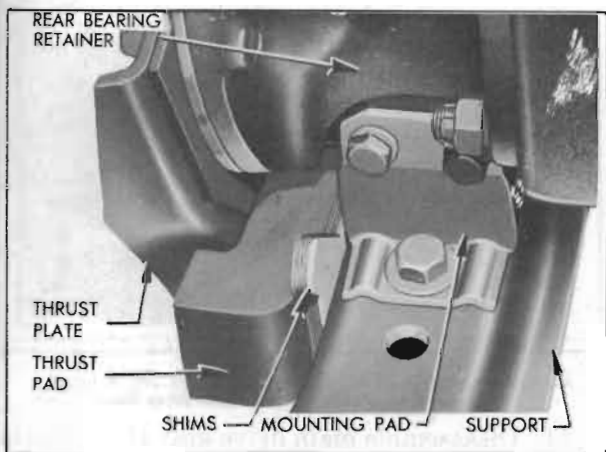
Transmission Mounting Pad, Thrust Pad and Shims
